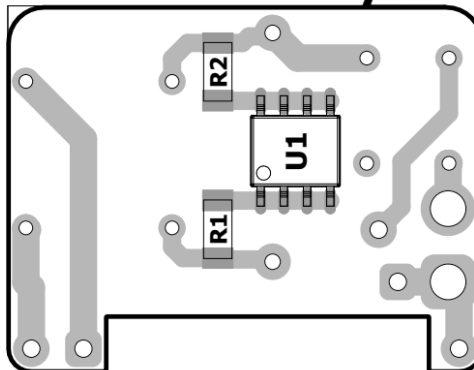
DER-822 Rev B Main Board Assembly Bottom.
